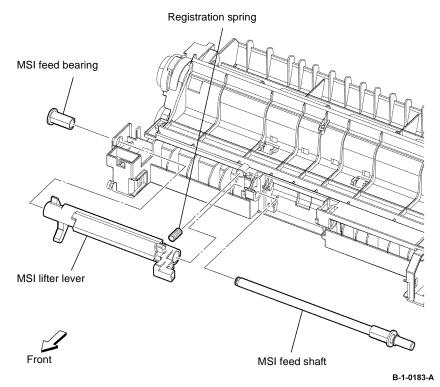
MSI spring, feed bearing, lifter lever and feed shaft removal
